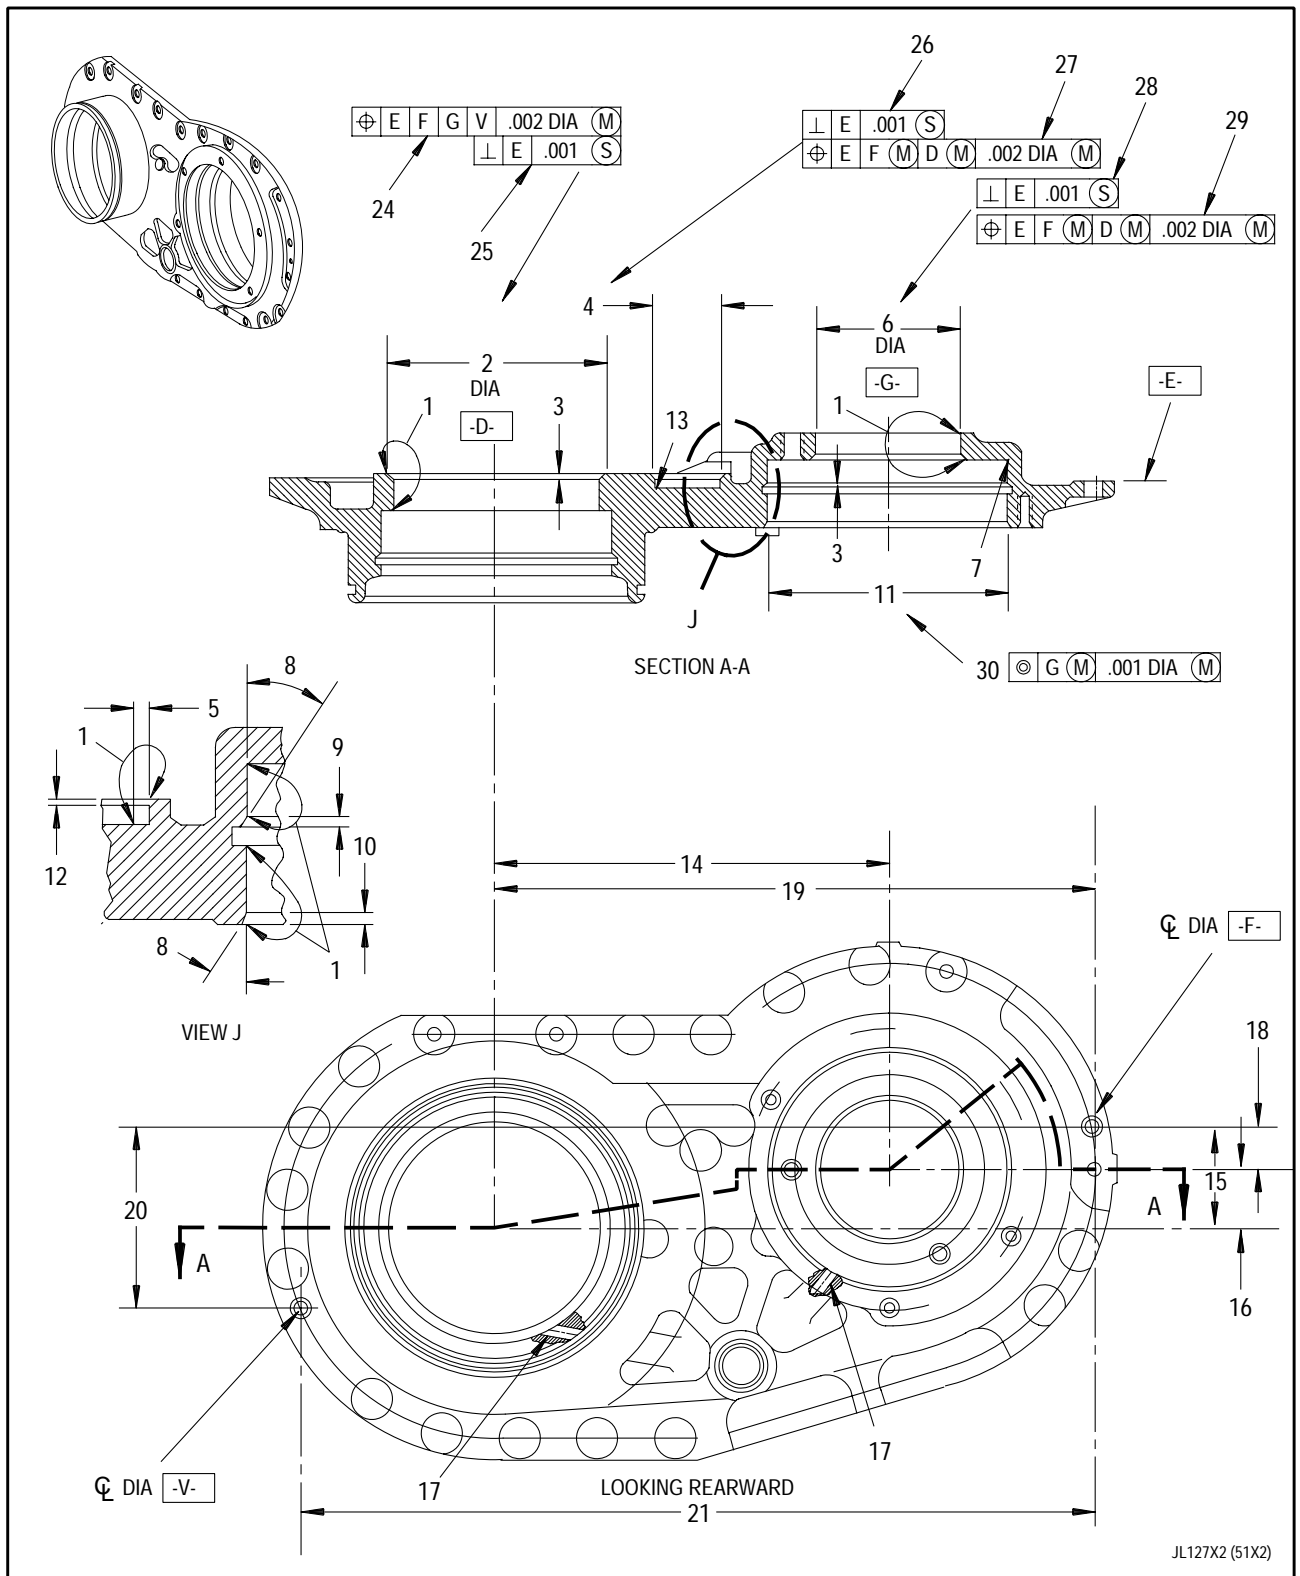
Gearbox (Front) Housing Assembly - Snap Diameter Repair (Sheet 1 of 2)
